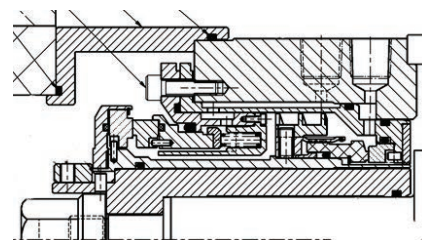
This cutaway shows the first high-pressure USP sealing arrangement
